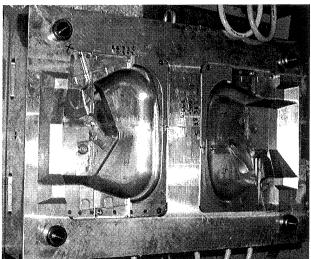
Large Double Injection Mould Assembled from Several Inserts
